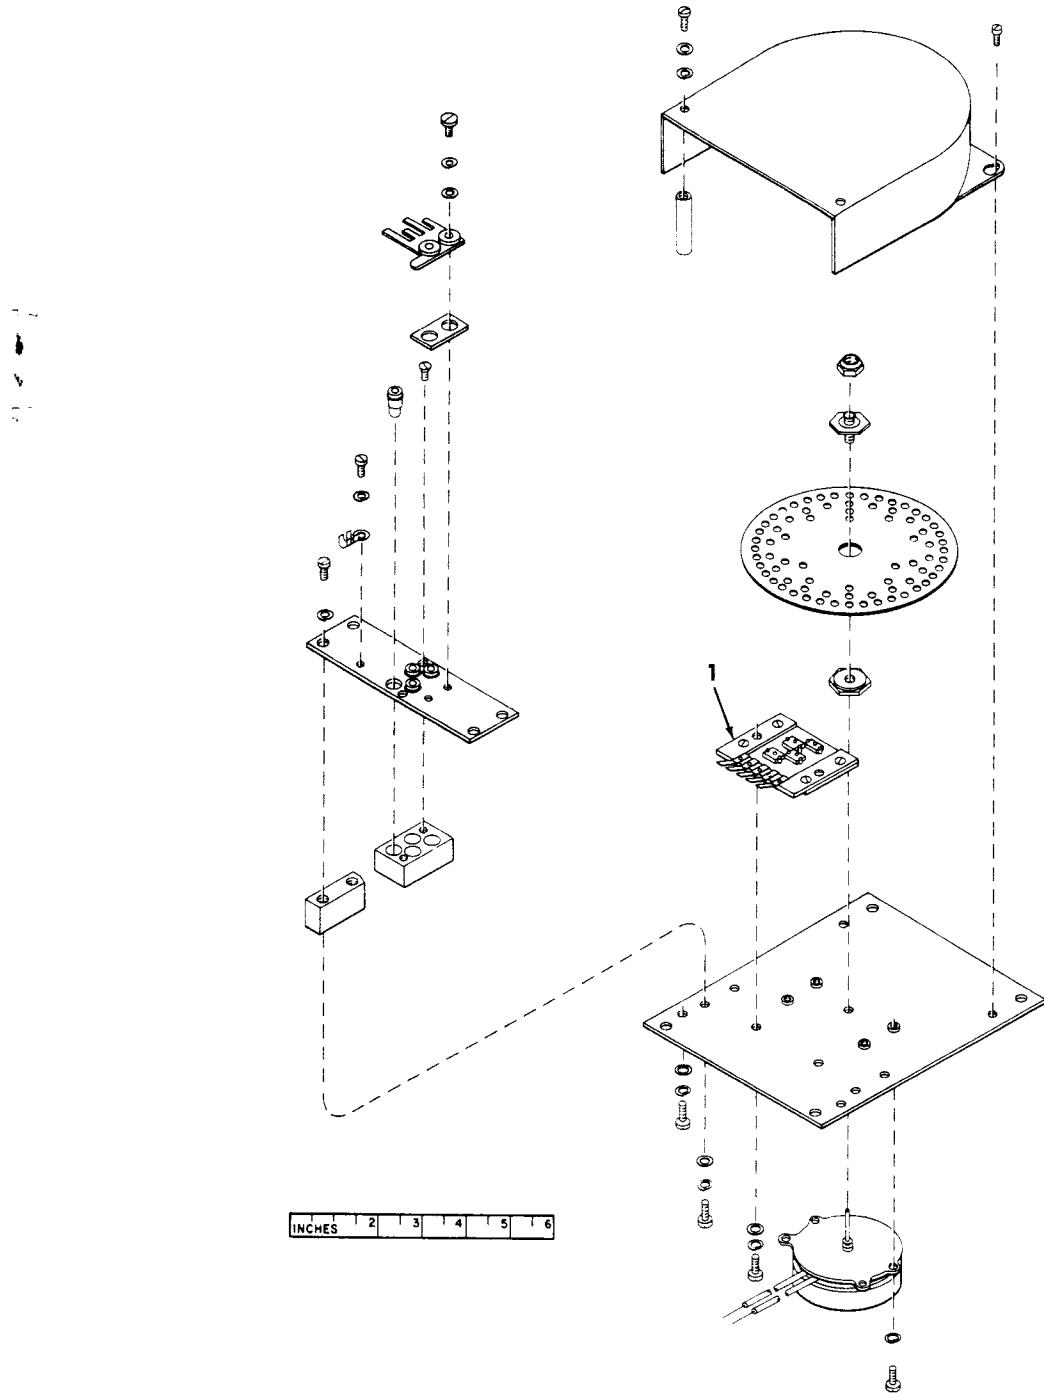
Generator, pulse O-300A/M (9000007) – partial exploded view
